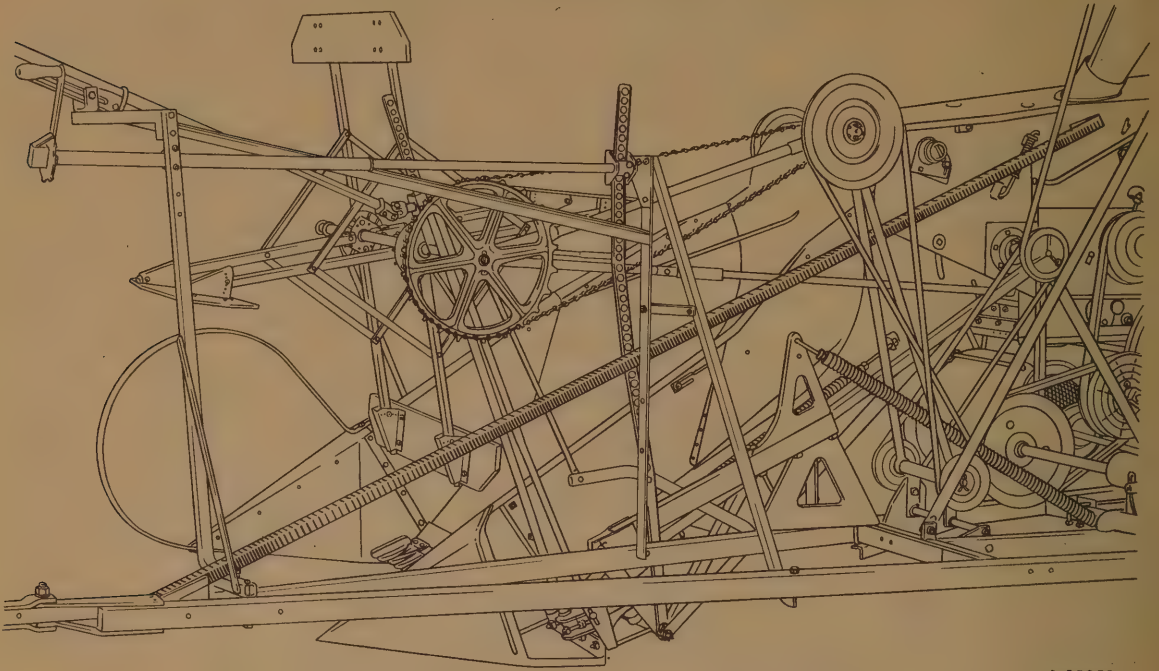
Grain tank unloader elevator suspension pipe. (Unloader elevator in upright position.)
